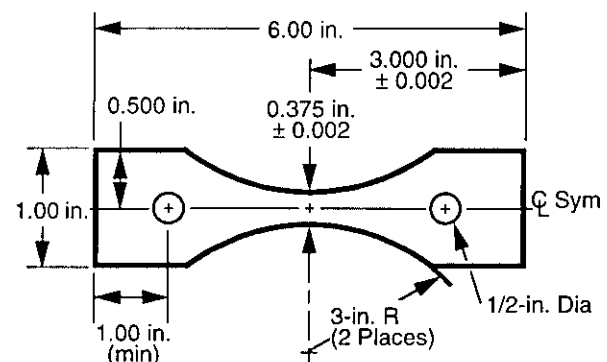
Smooth fatigue ($K_t = 1$) specimen with radiused reduced section
